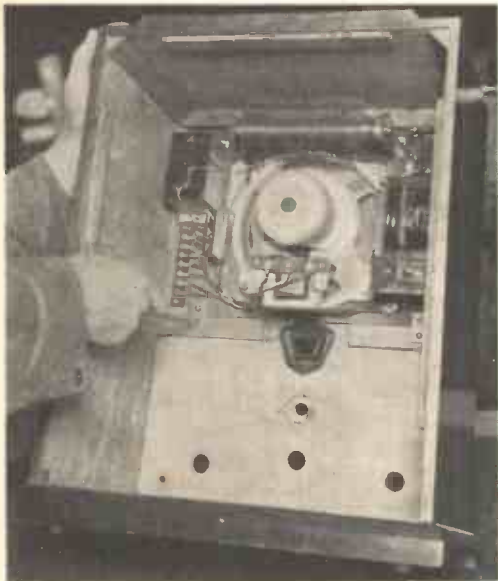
HOW TO WITHDRAW THE CHASSIS AND POWER PACK FROM THE CABINET.
